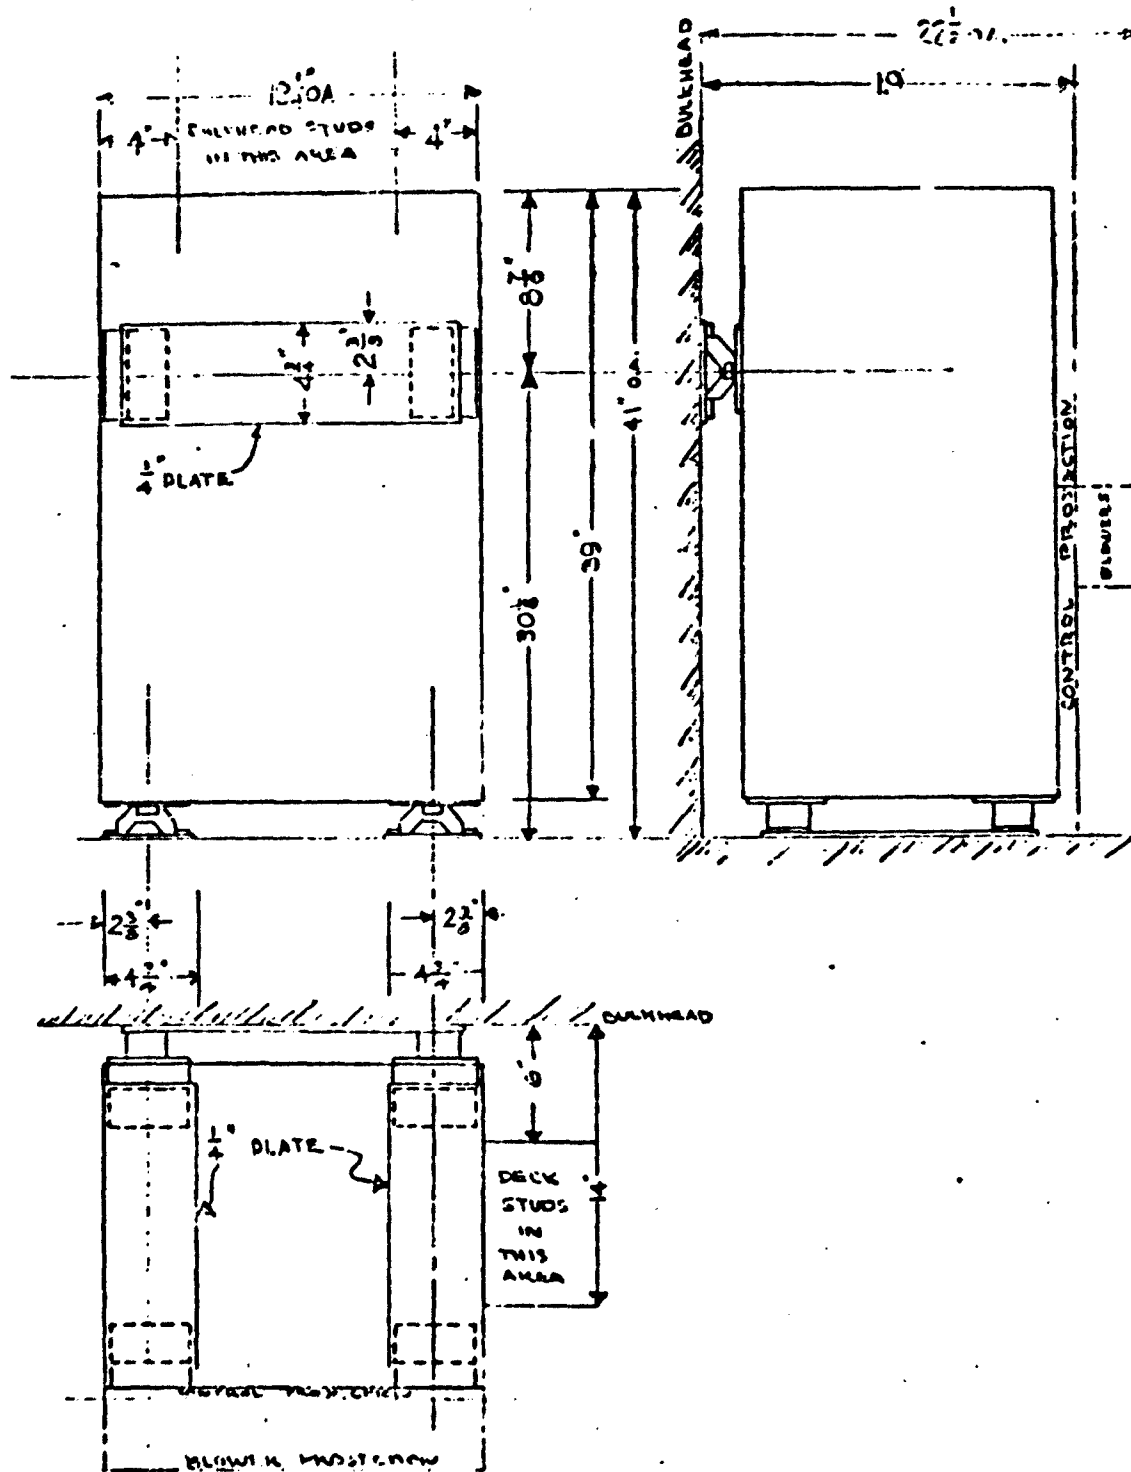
Outline and Mounting Dimensions, DRRC Equipment
